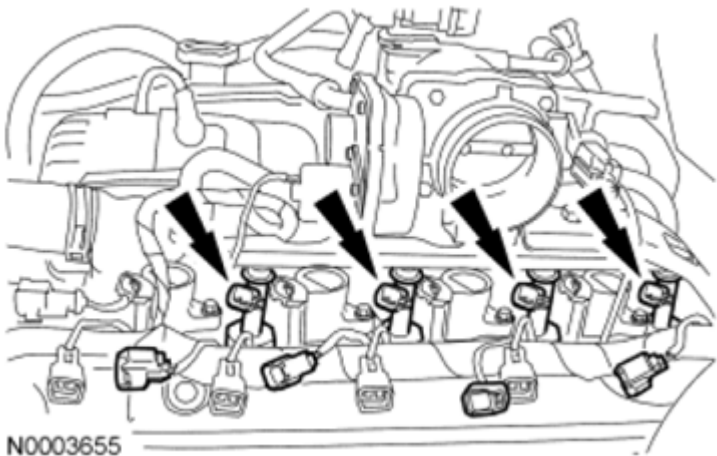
Locating Bolts And Intake Manifold Shield
